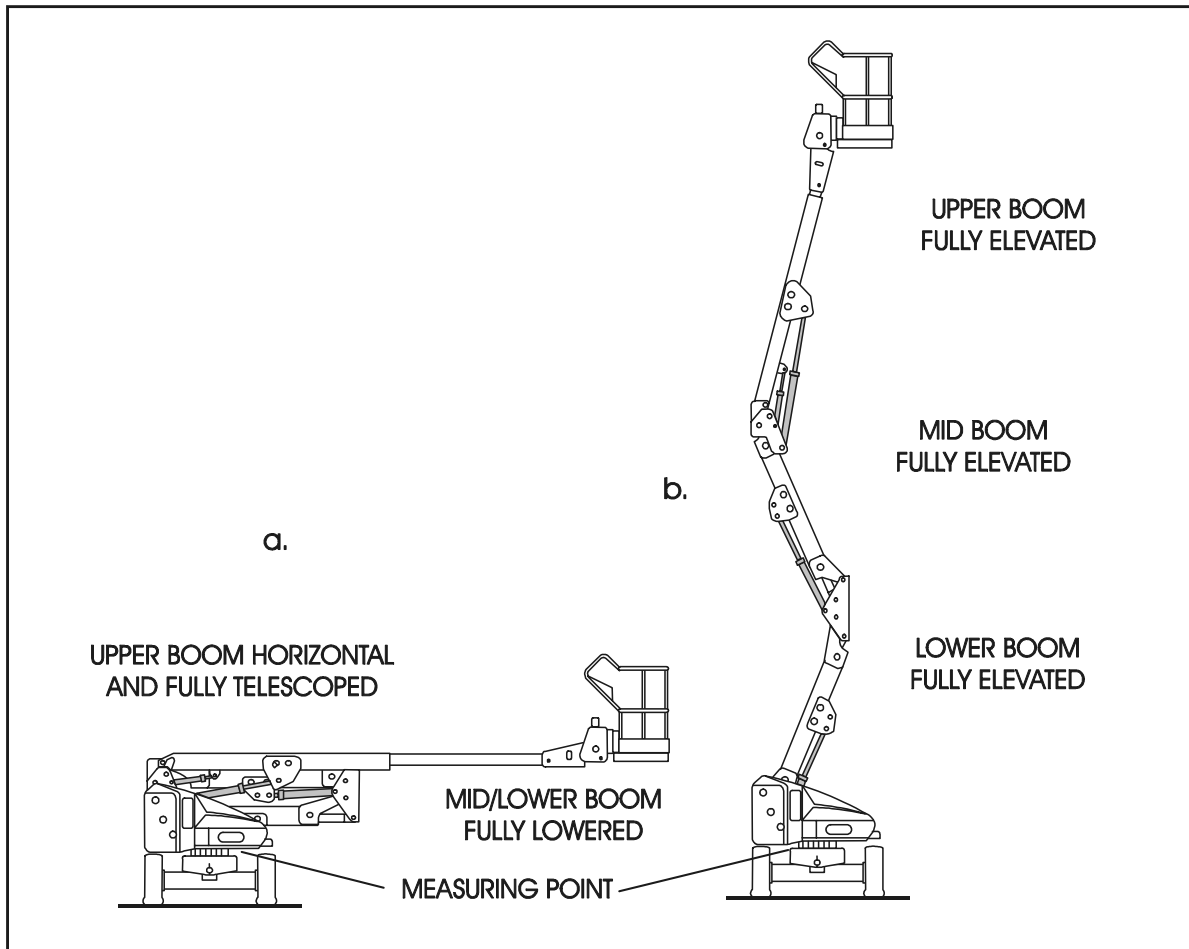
Swing Bearing Tolerance Boom Placement
